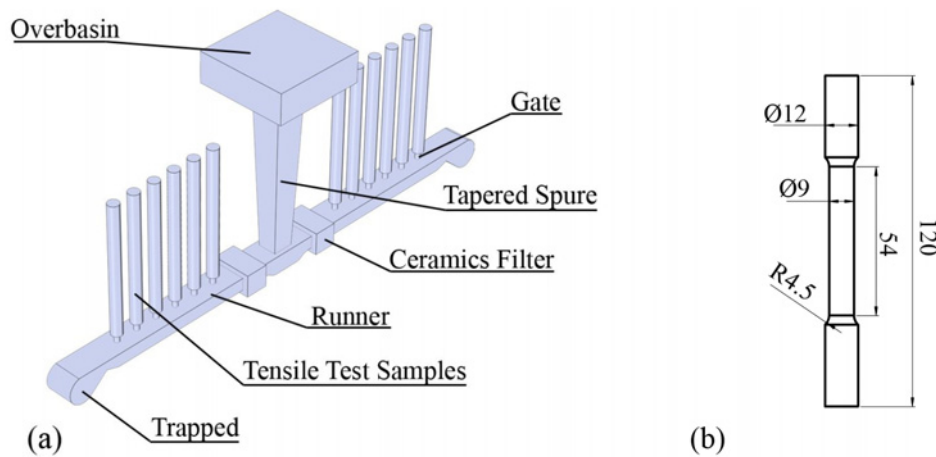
3D view of the casting and runner system (a) and tensile test sample dimensions (b) used in the study.
